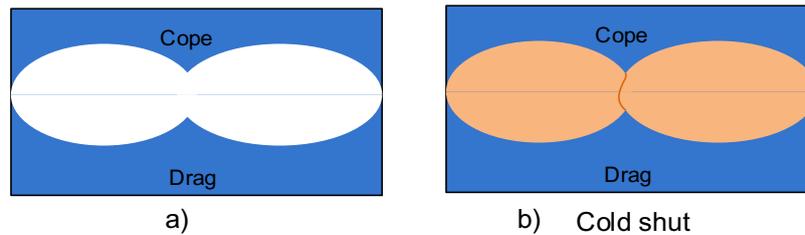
Schematic showing a) desired casting and b) casting with defects like cold shot due to low temperature of the molten metal / faulty gating system design.
